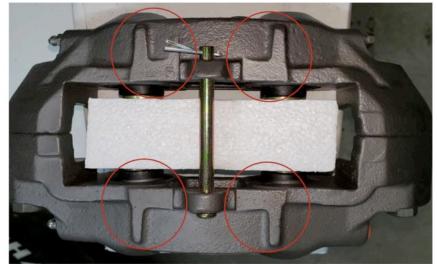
RR Caliper top view. Red circles show machined areas adjacent of the disc brake pads retaining pin.
